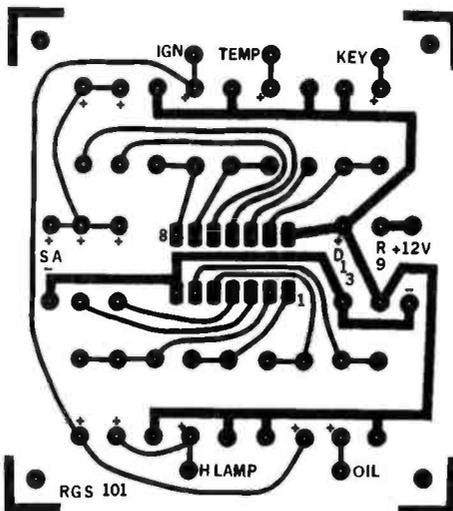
Etching and drilling guide for pc board is shown below; component layout at left.
